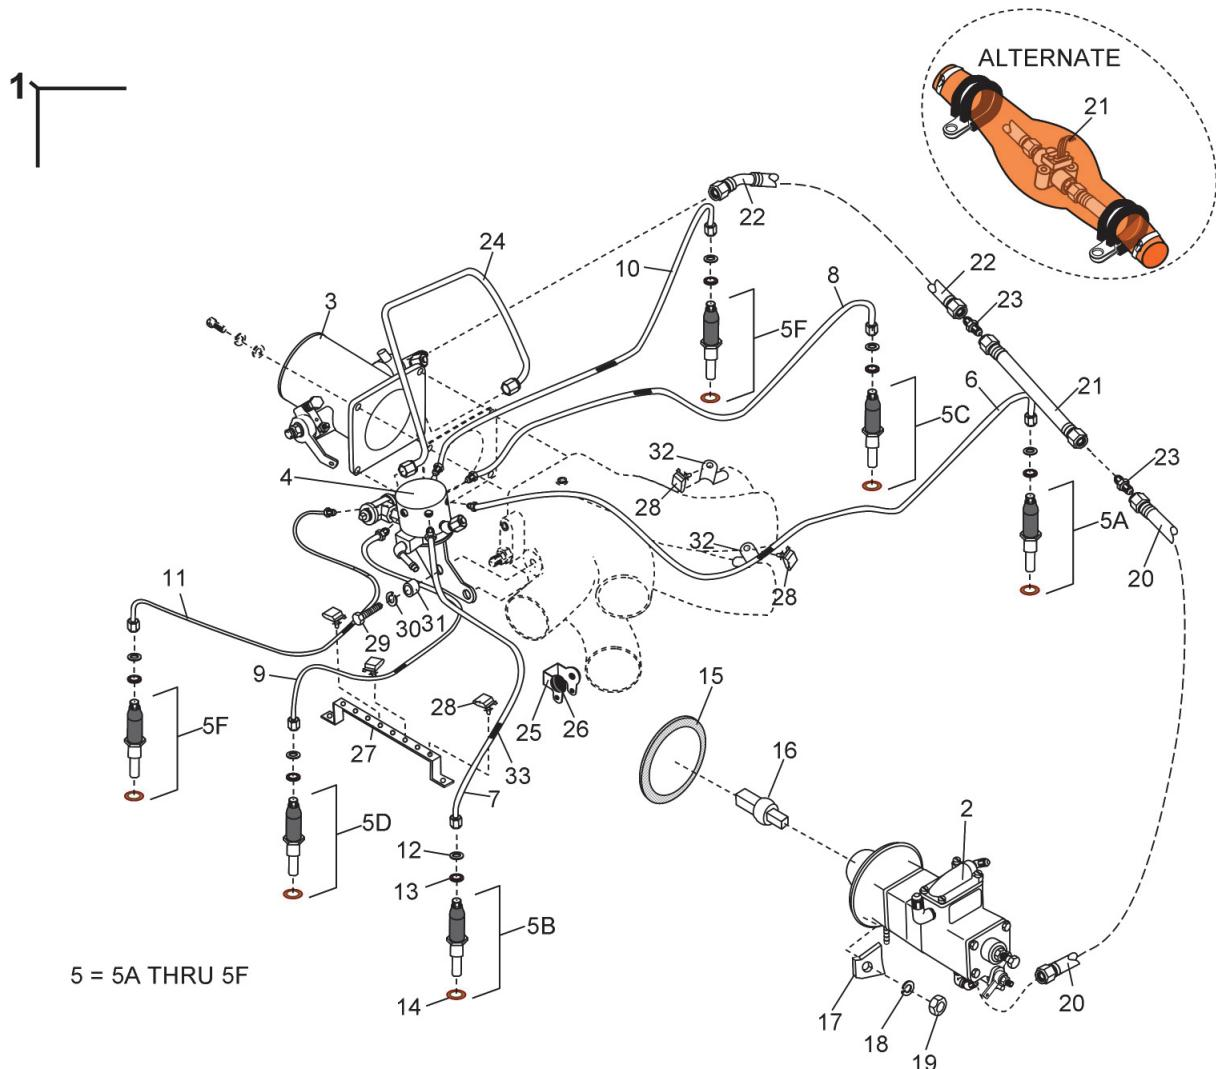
IO-550-G, N, P & R Fuel Injection Assembly G N P R
